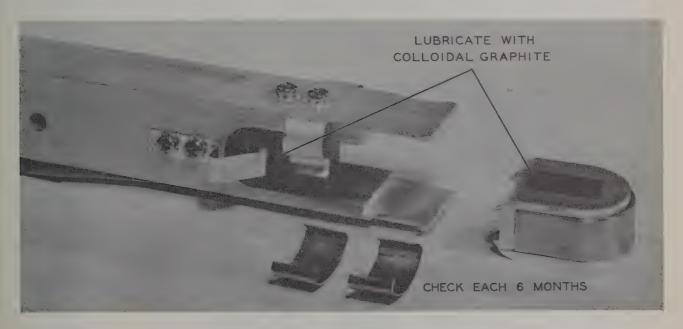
Lubrication of IPA Plate Tank Sliding Contact Assembly.
